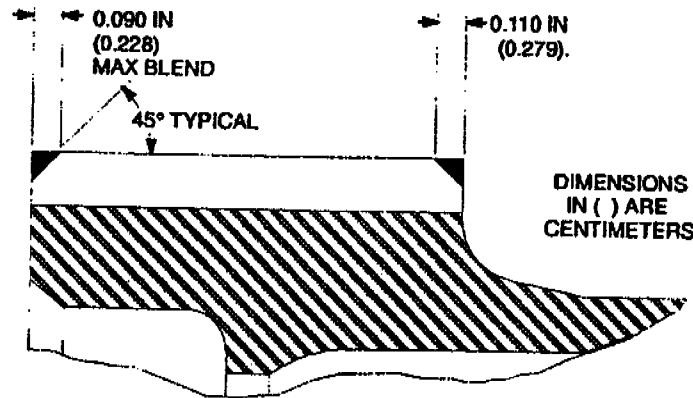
Sun Gearshaft - Repair Area (T53-L-13B, -703).
